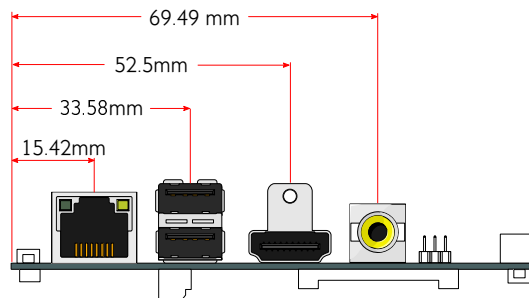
External I/O port dimensions of the VIA VAB-820 (back panel)
